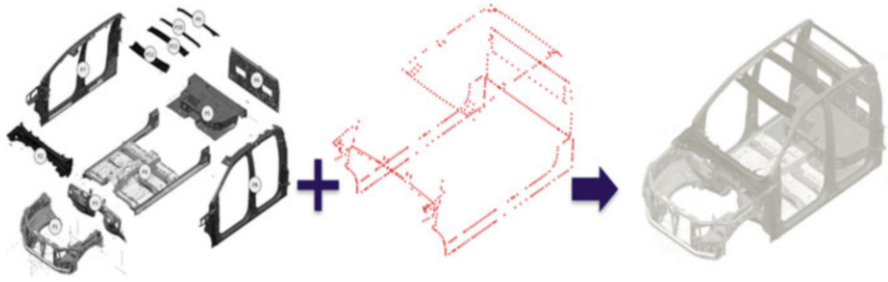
Hundreds of welds connect the main assemblies together to shape the bodyshell
